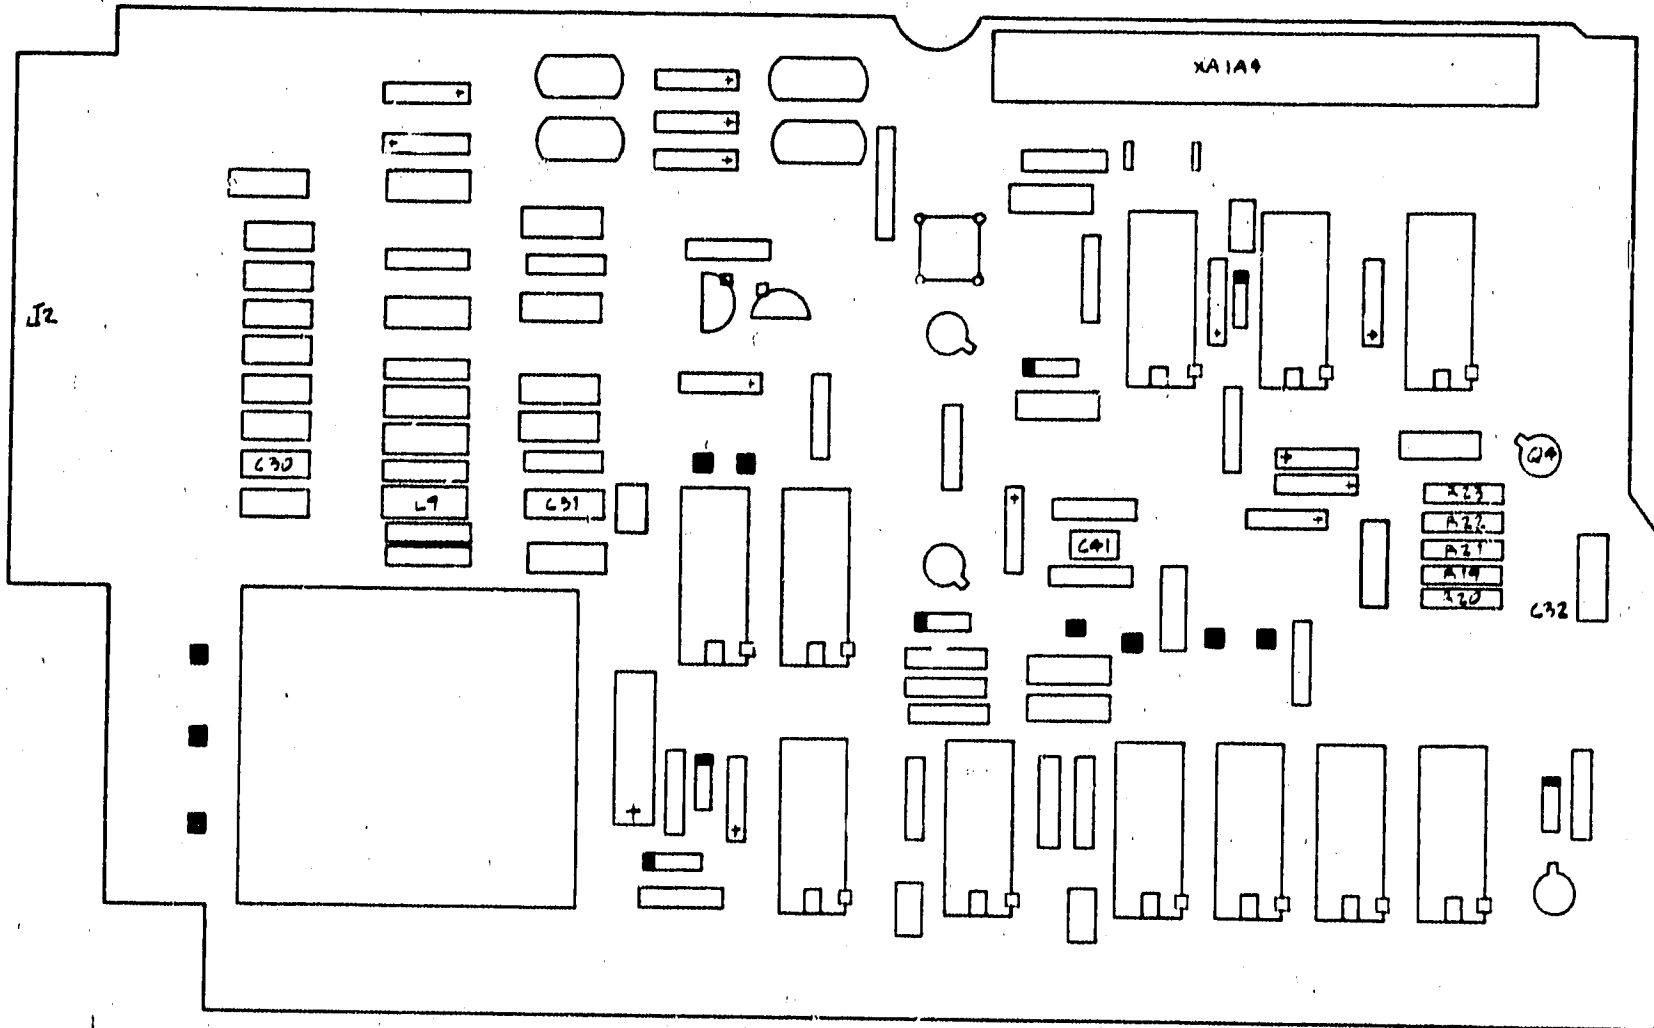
P/O A1A3 Time Base Board Assembly (Translator) Component Locations
